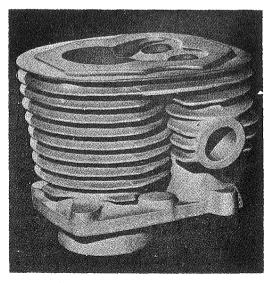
Core-sand casting for air-cooled cylinder block. (Courtesy of Motor Castings Co.)
